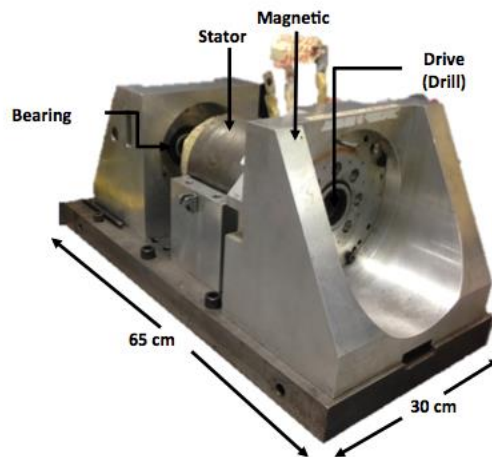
The old test fixture that is used by Turbocor for the smaller compressor.
